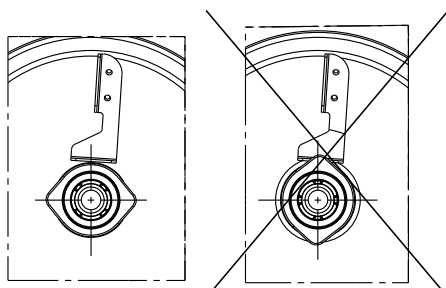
Fitting the O-ring on the stationary shaft seal part
